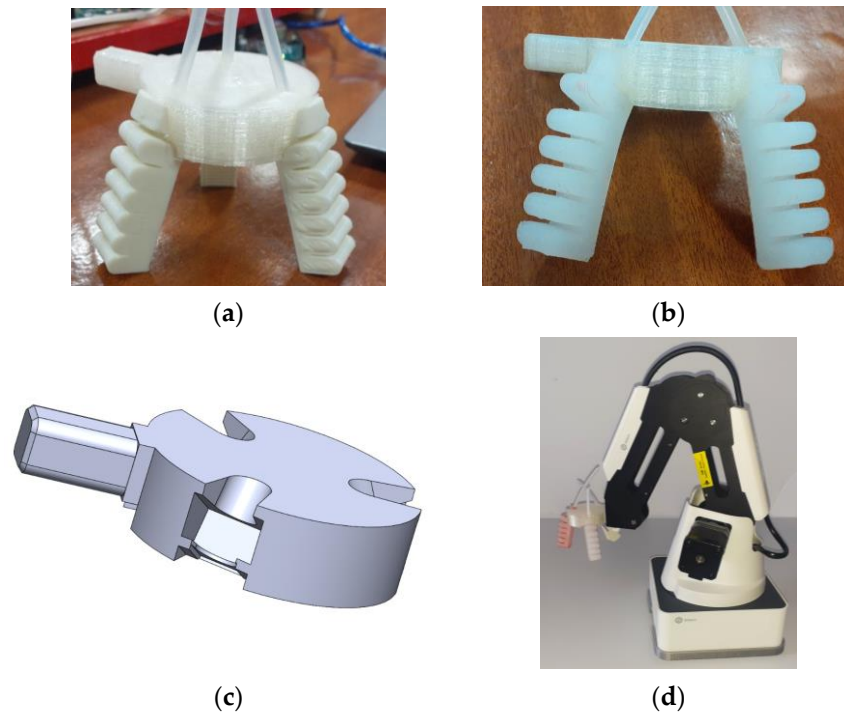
PneuNet actuators of type 1 mounted on the PLA FDM-printed coupling base. (a) fabricated with FDM using Filaflex 60A filament and (b) made with DragonSkin Fast 10 silicone by molding, (c) gripper coupling base, and (d) Dobot robot with soft gripper installed.
